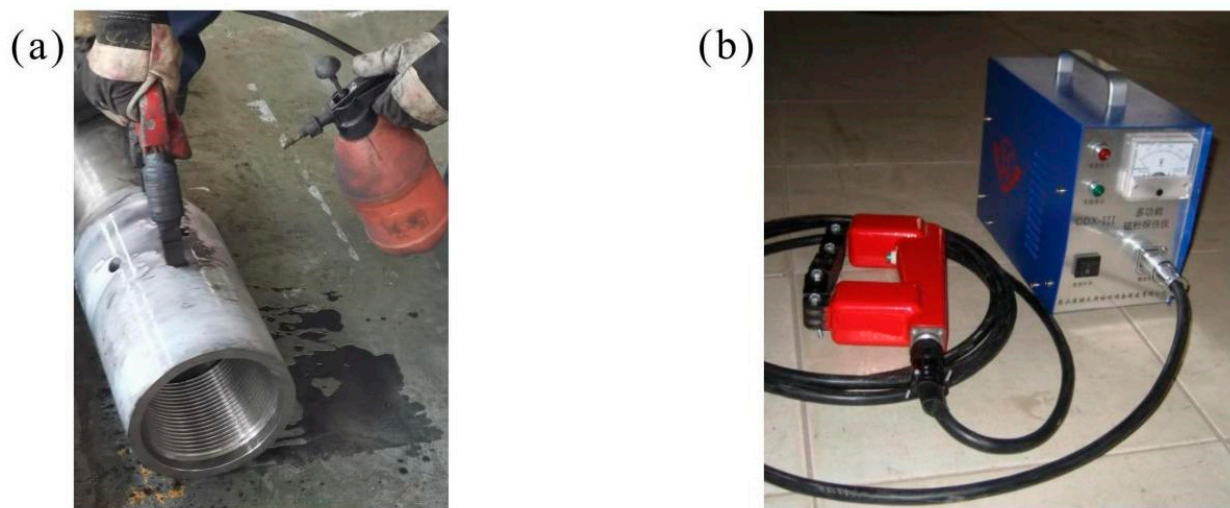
Torsion test flaw detection process and equipment. (a) Flaw detection process; (b) flaw detection equipment.
